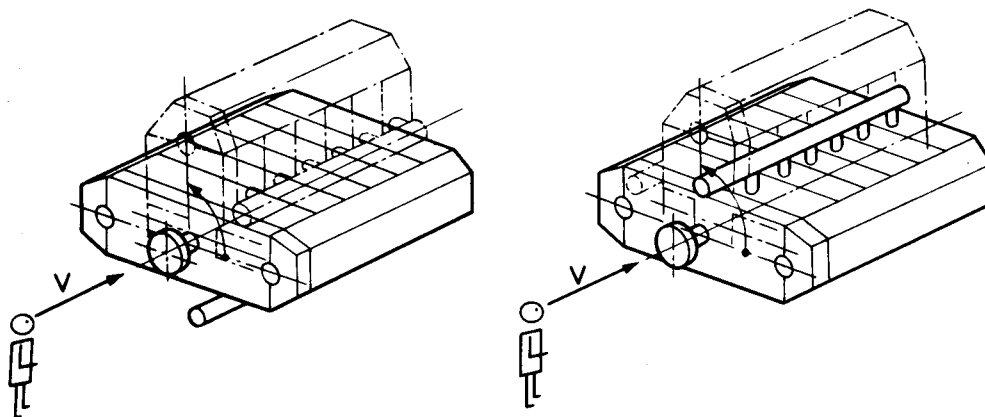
Right-hand single bank opposed piston engine FIGURE 3f – Left-hand single bank opposed piston engine
